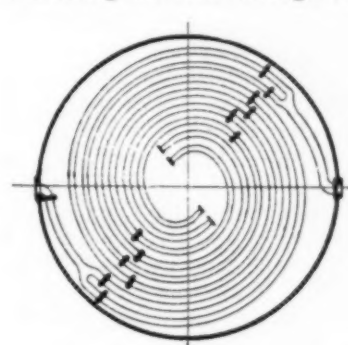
COIL VACUUM PAN, QUADRUPLE COILS
